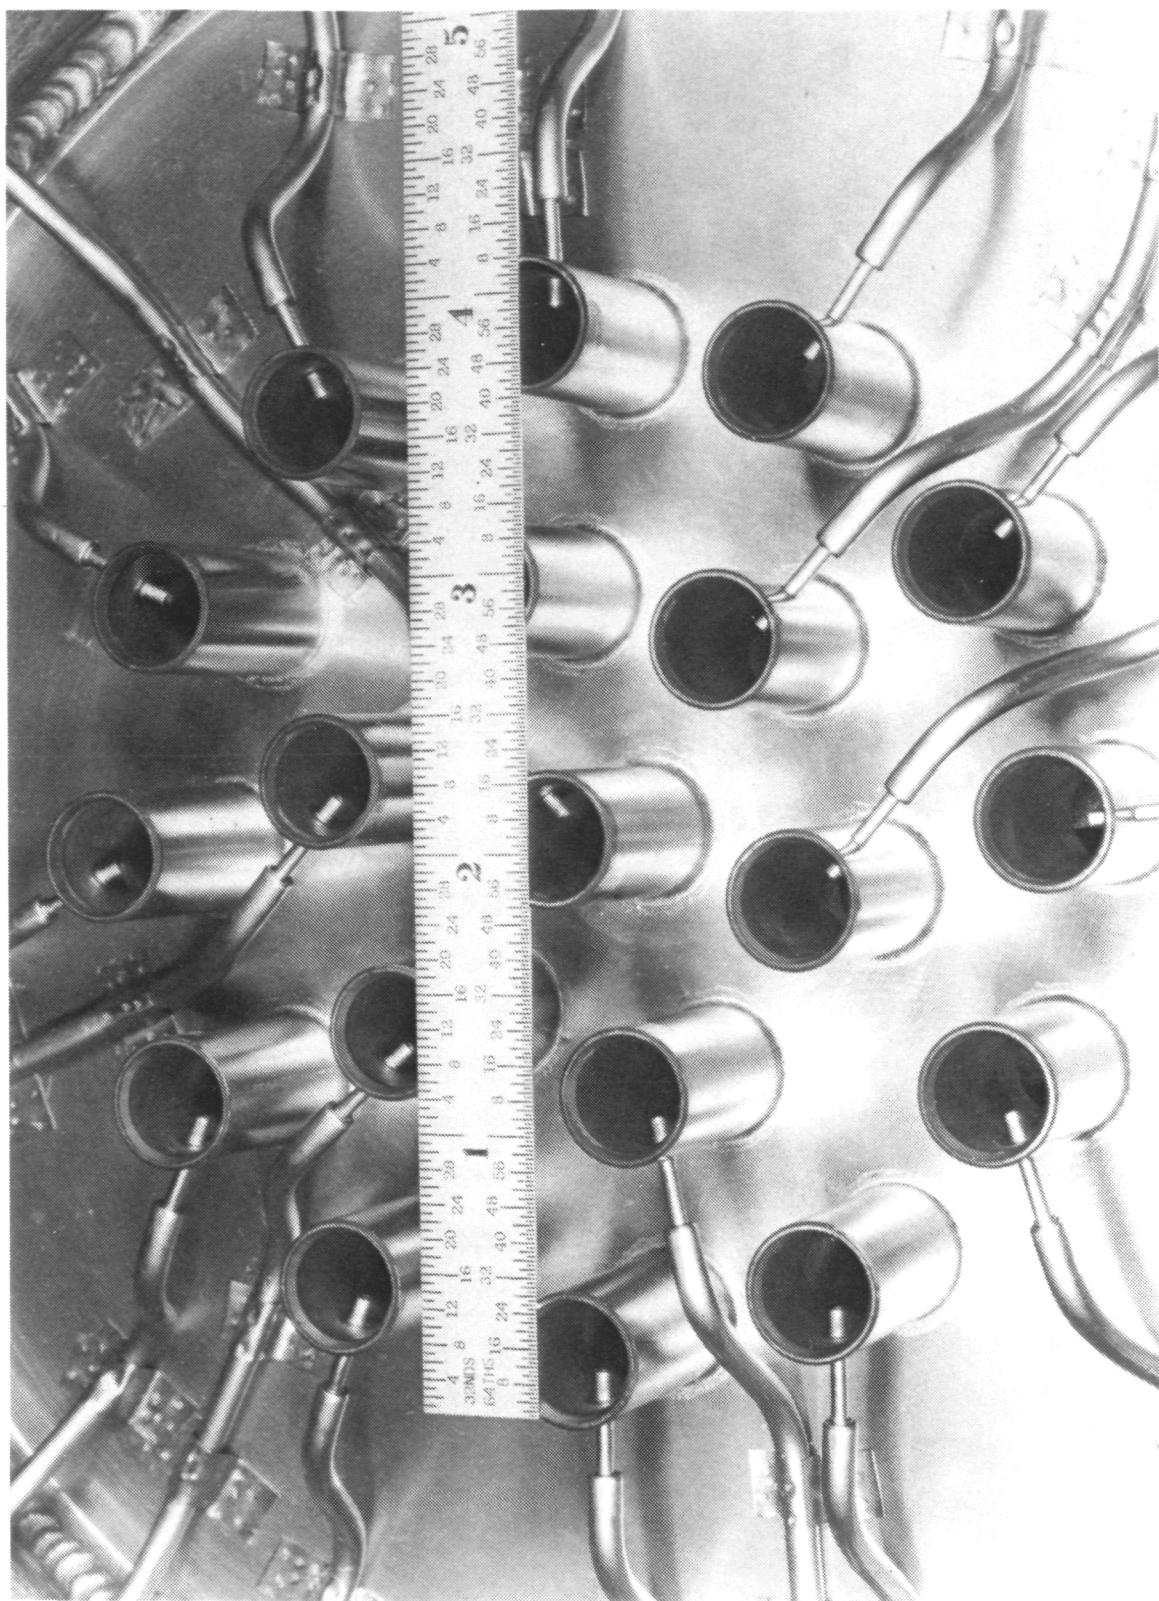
Multiple-Tube Injector Fuel Tube Installation.
